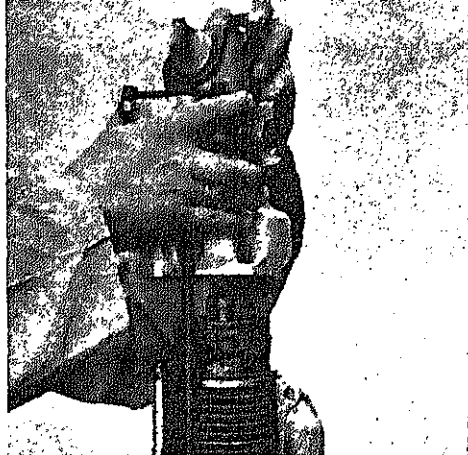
The lower section is lifted carefully, after first having unscrewed the two nuts with set bolts.
